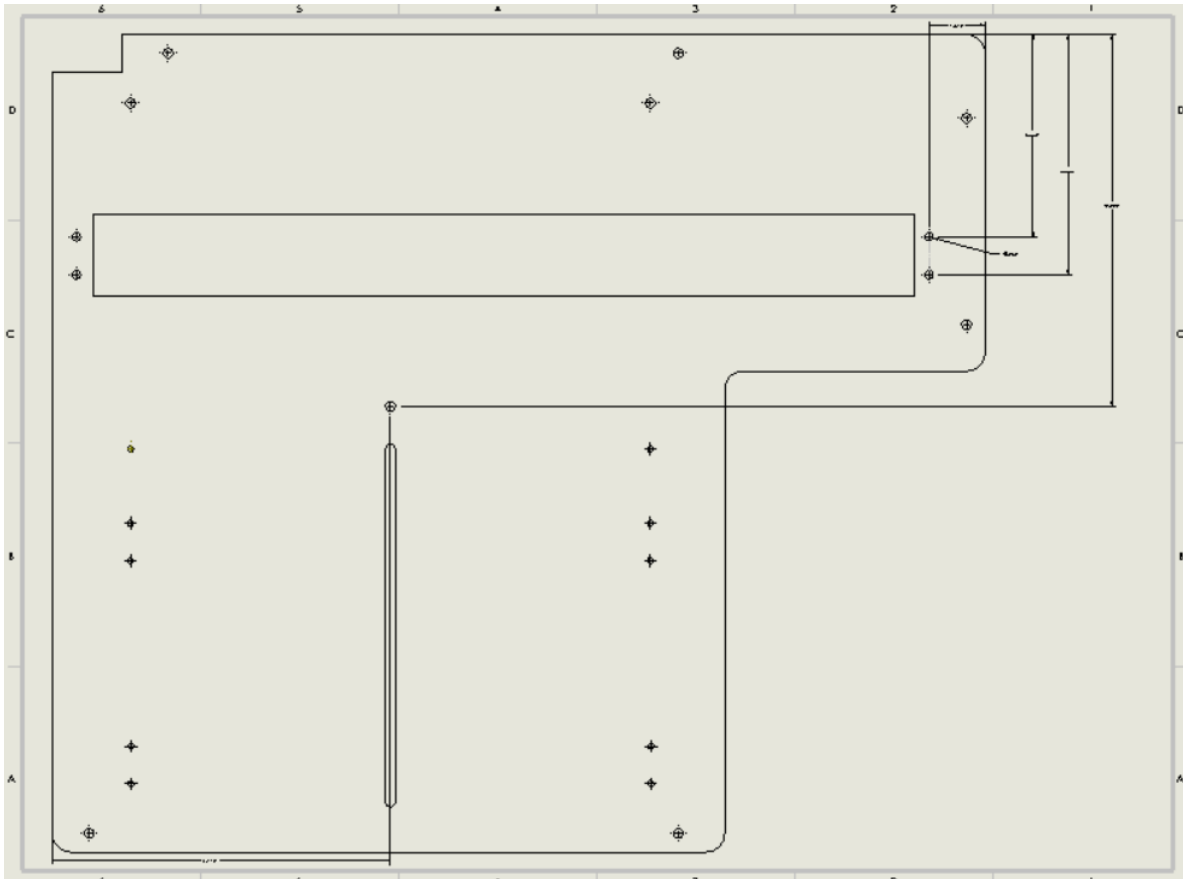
SOLIDWORKS drawings of the first piece of the baseplate
